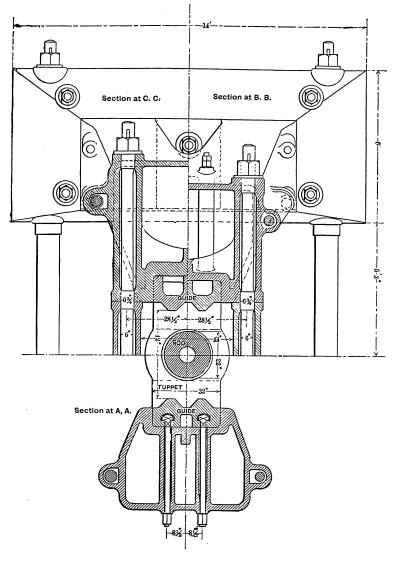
Horizontal Sections, Fig. 1, as Indicated.
